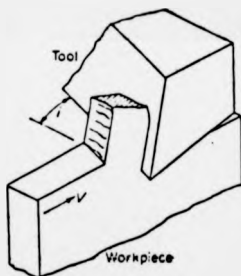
Oblique cutting- Angle of inclination of cutting edge i
